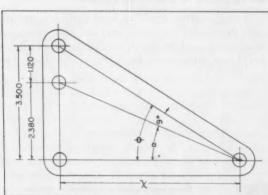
Jig plate with unknown dimension (x) and angles φ and α required to fix position of right-hand hole.
